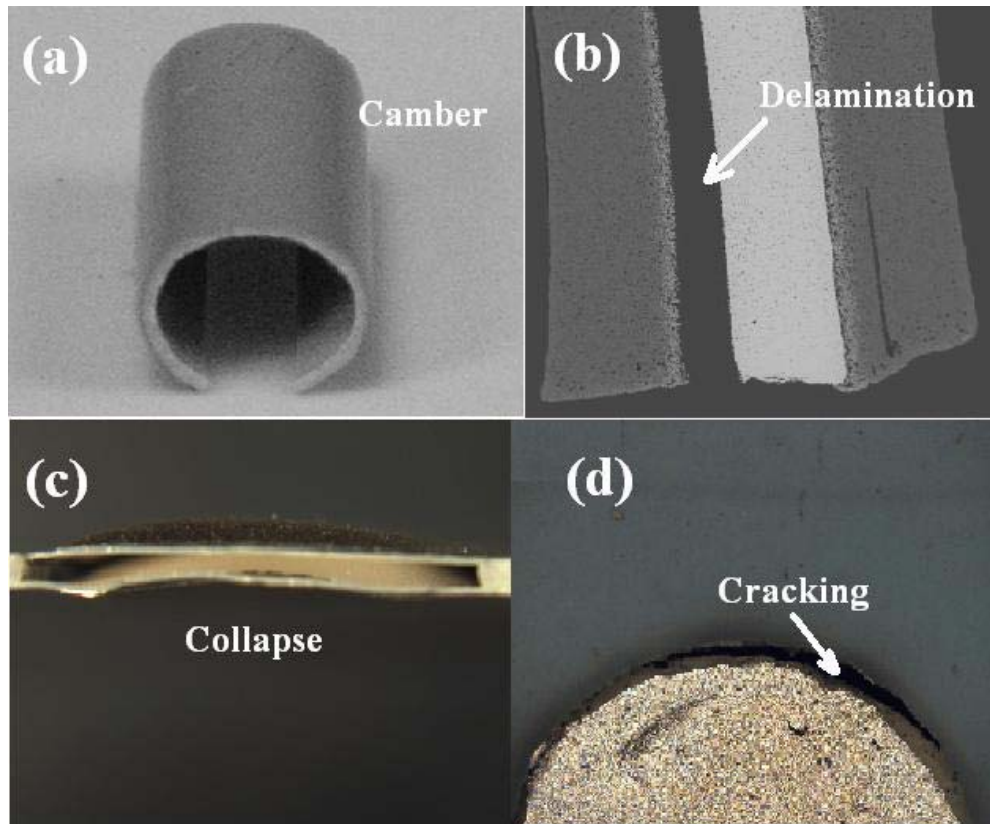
Images of deformation and failure in co-fired LTCC multilayer structures. (a) camber, (b) delamination, (c) collapse, and (d) cracking.
